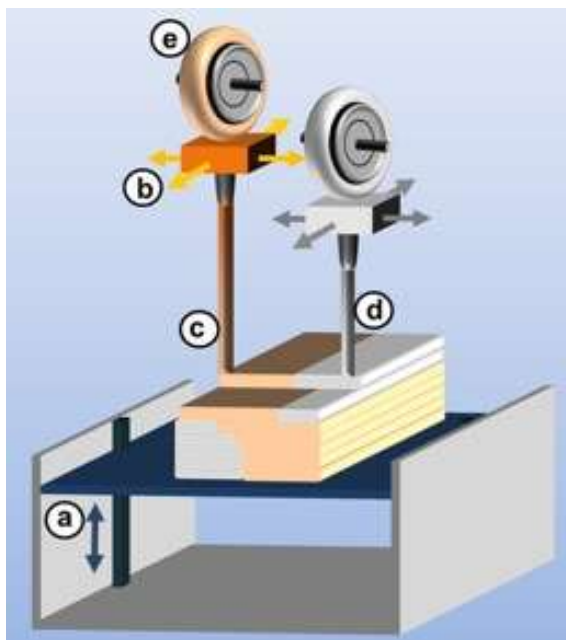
Schematic of a fused deposition modeling printer.³⁷ The components are (a) the build platform, (b) the print head where feedstock is heated and extruded from a nozzle, (c) one type of feedstock, (d) another type of feedstock and (e) the spool of a feedstock filament. Reprinted from Chemical Reviews, 117, Ligon S. C., Liska R., Stampfl J. R., Gurr M., and Mülhaupt R., Polymers for 3D printing and customized additive manufacturing, 10212 - 10290, Copyright (2017) with permission from ACS. <https://pubs.acs.org/doi/abs/10.1021/acs.chemrev.7b00074>. Permission requests should be directed to ACS.
